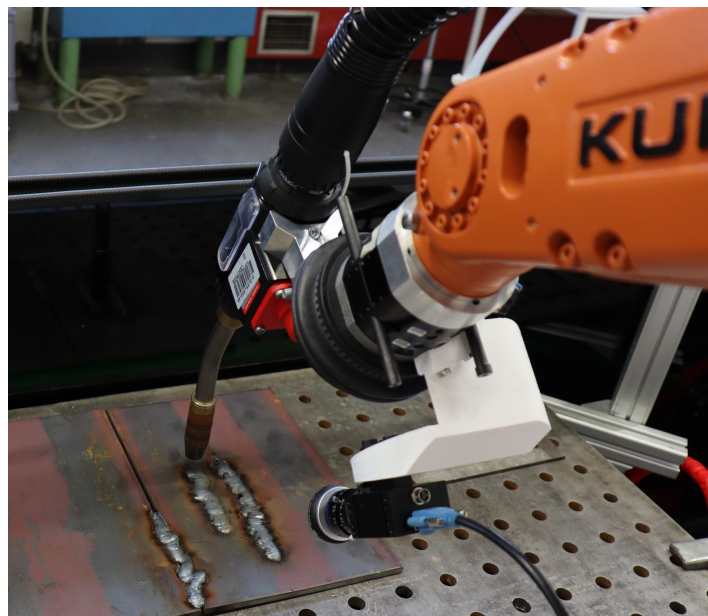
Experimental setup with the welding gun and seam observation camera.
